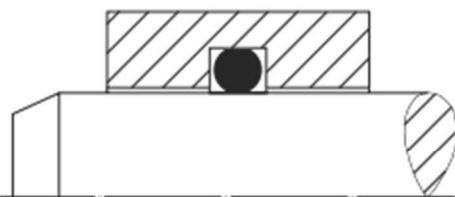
Female gland ("rod seal"): O-ring with radial compression
